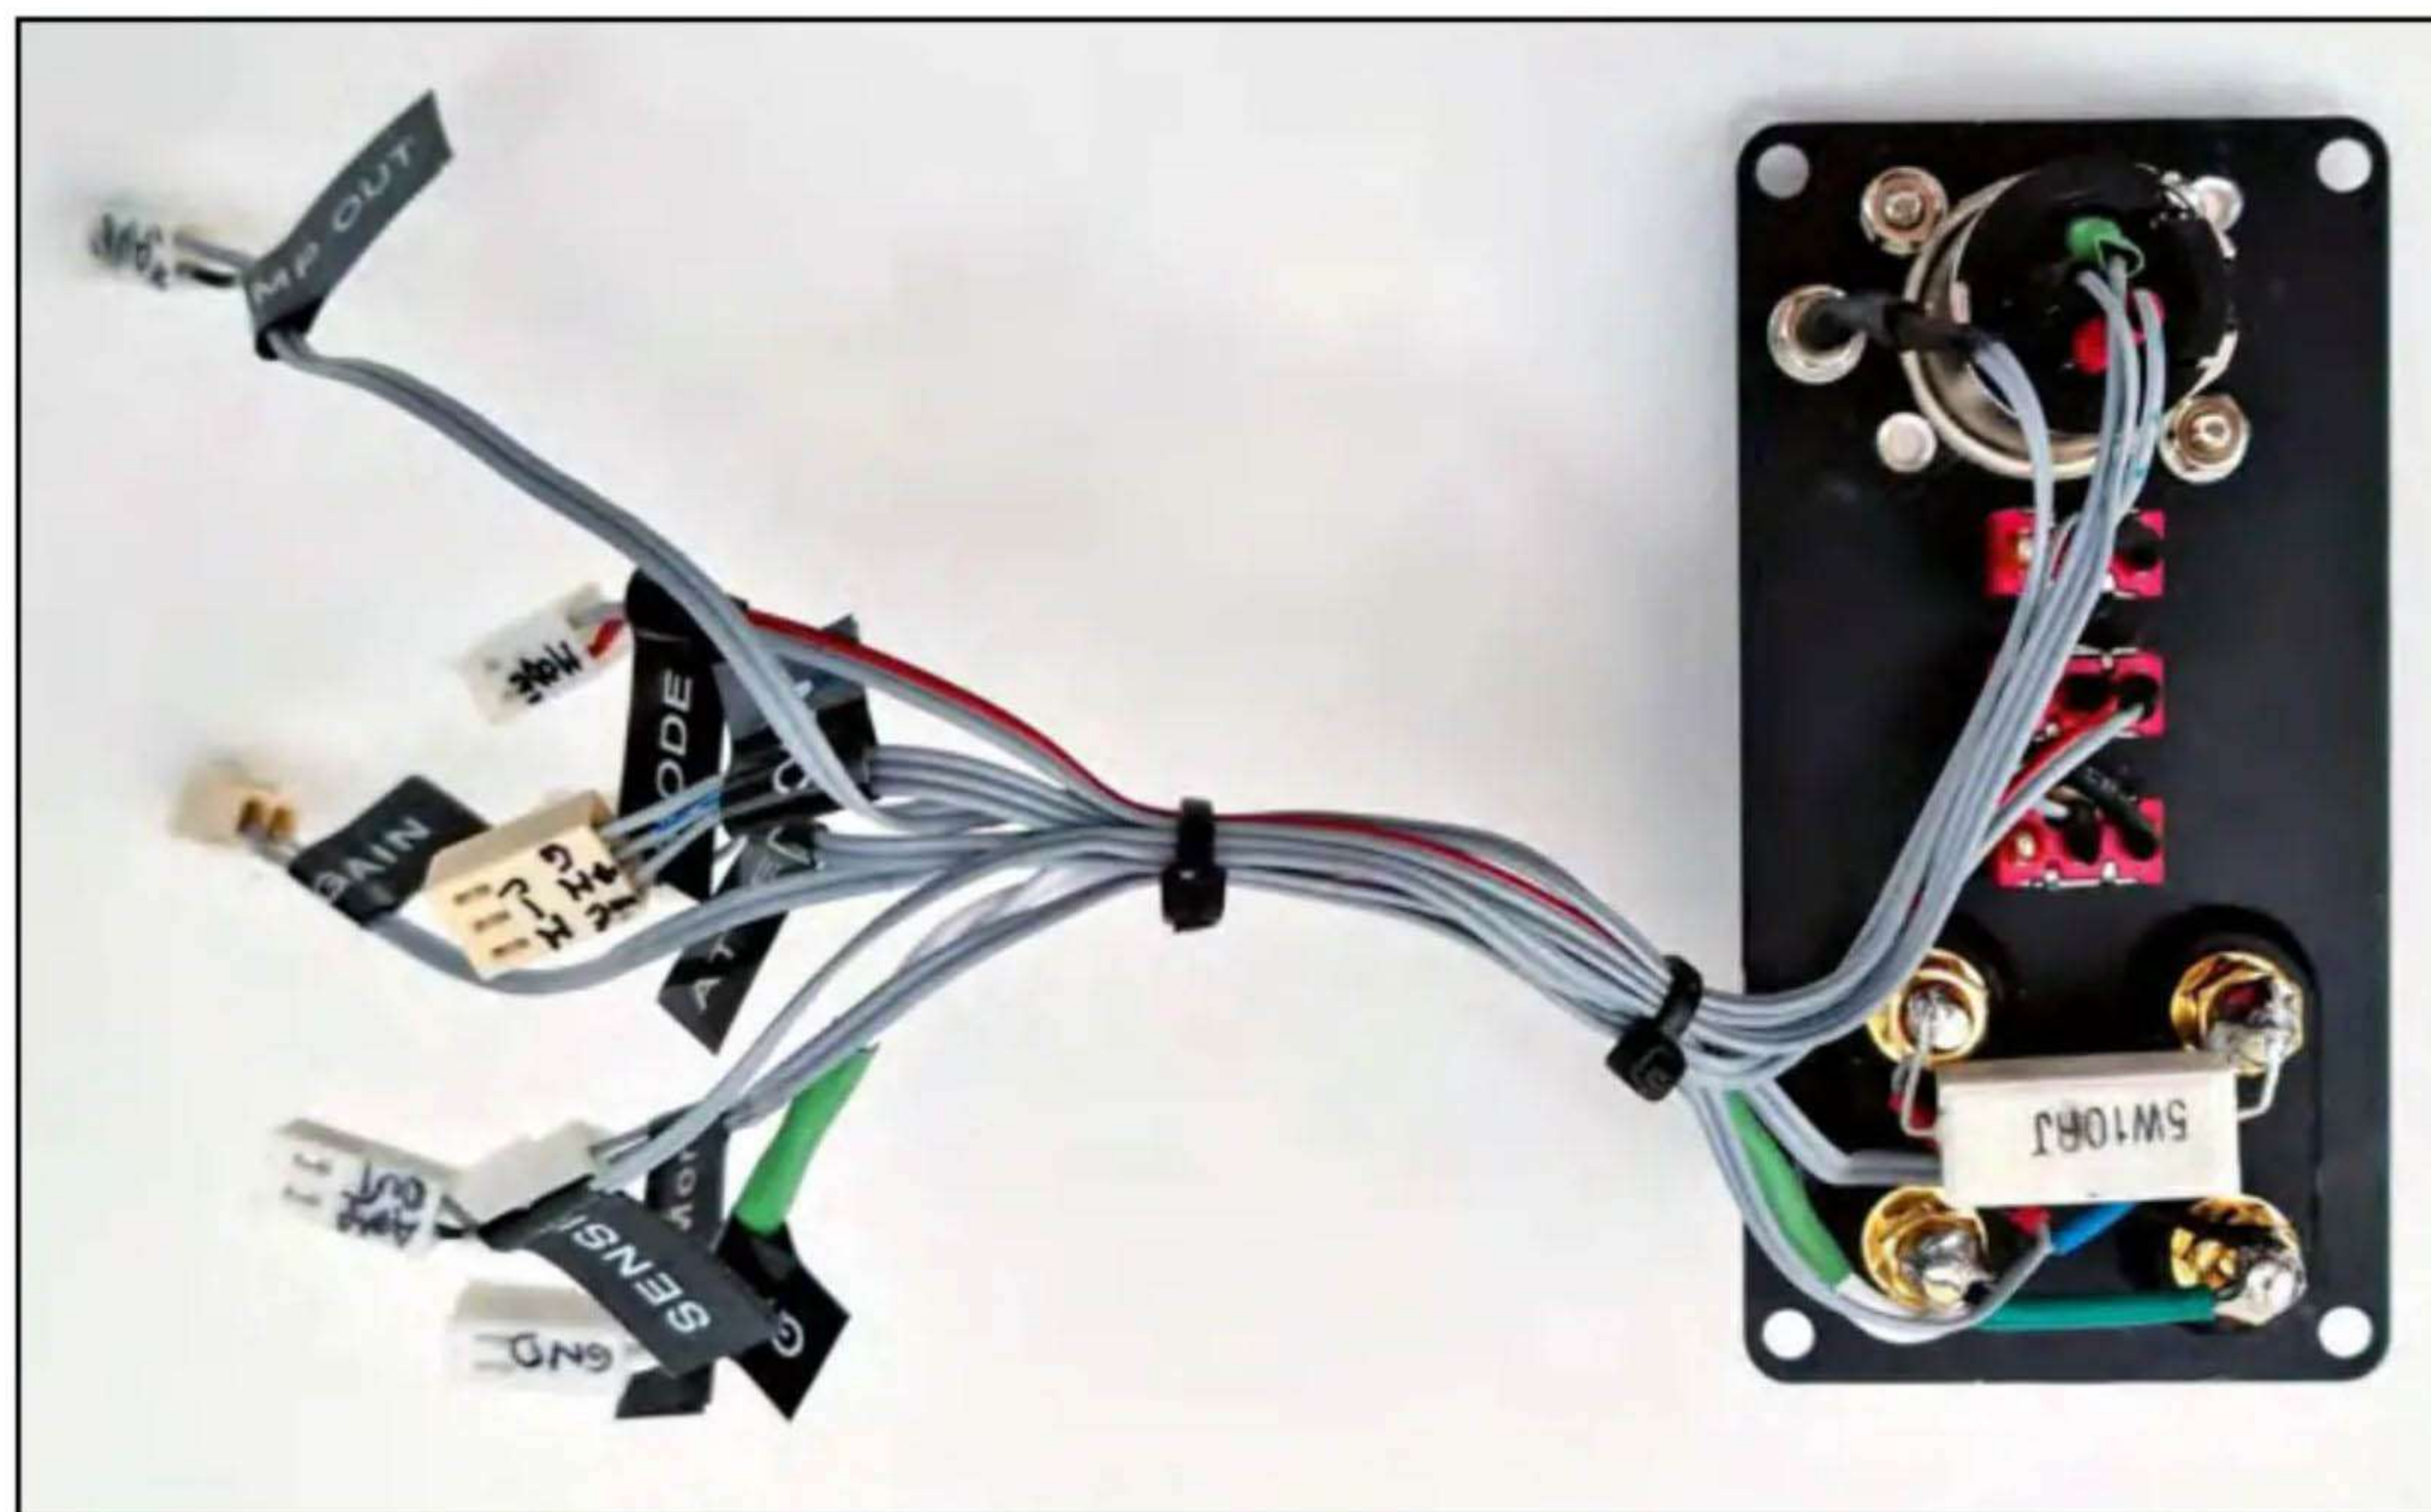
label the plugs and wire so that you don't get them mixed up when plugging them into the PCB headers. This photo also shows more clearly how the reference resistor is connected.
